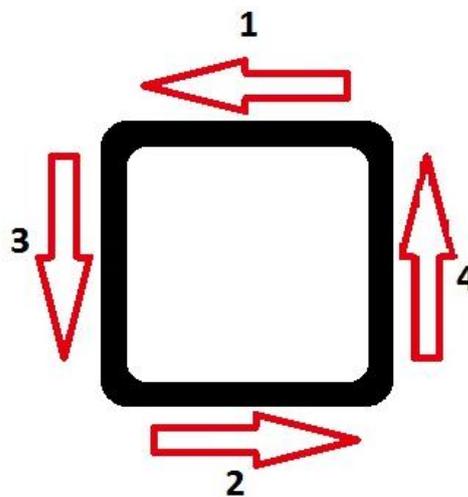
Order and direction welds should be made around a square tube joint
